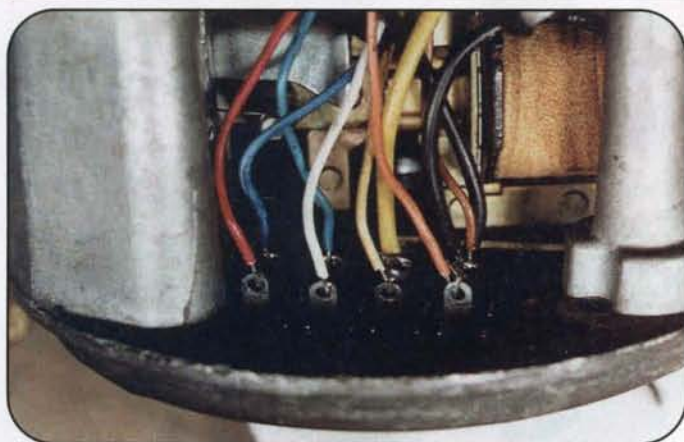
Terminal board and wiring viewed from the side of the rotor unit (see step 14).
